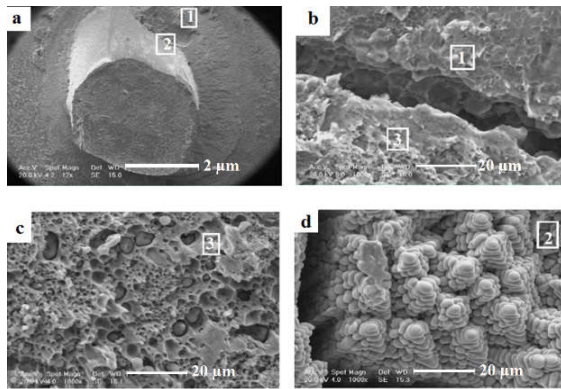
Microstructure of fracture surface by SEM of W3, a) fractured weld nugget in the tensile shear test, b) intergranular fracture by rotating the weld nugget, c) expansion of the crack adjacent to weld in the annealed zone, d) shear layers in sheet thickness.
